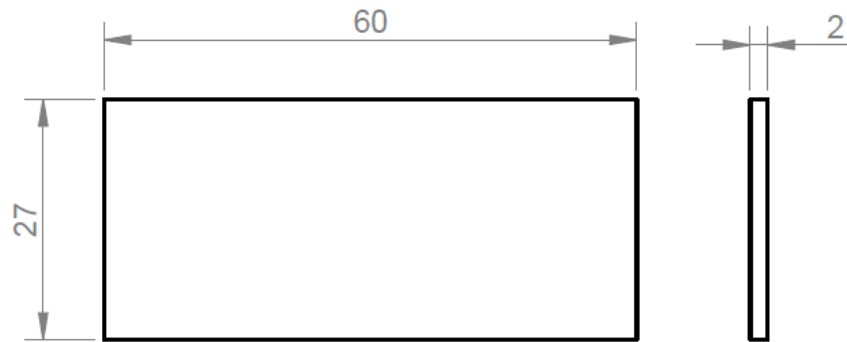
Dimensioned drawing of samples for welding – units are in mm
